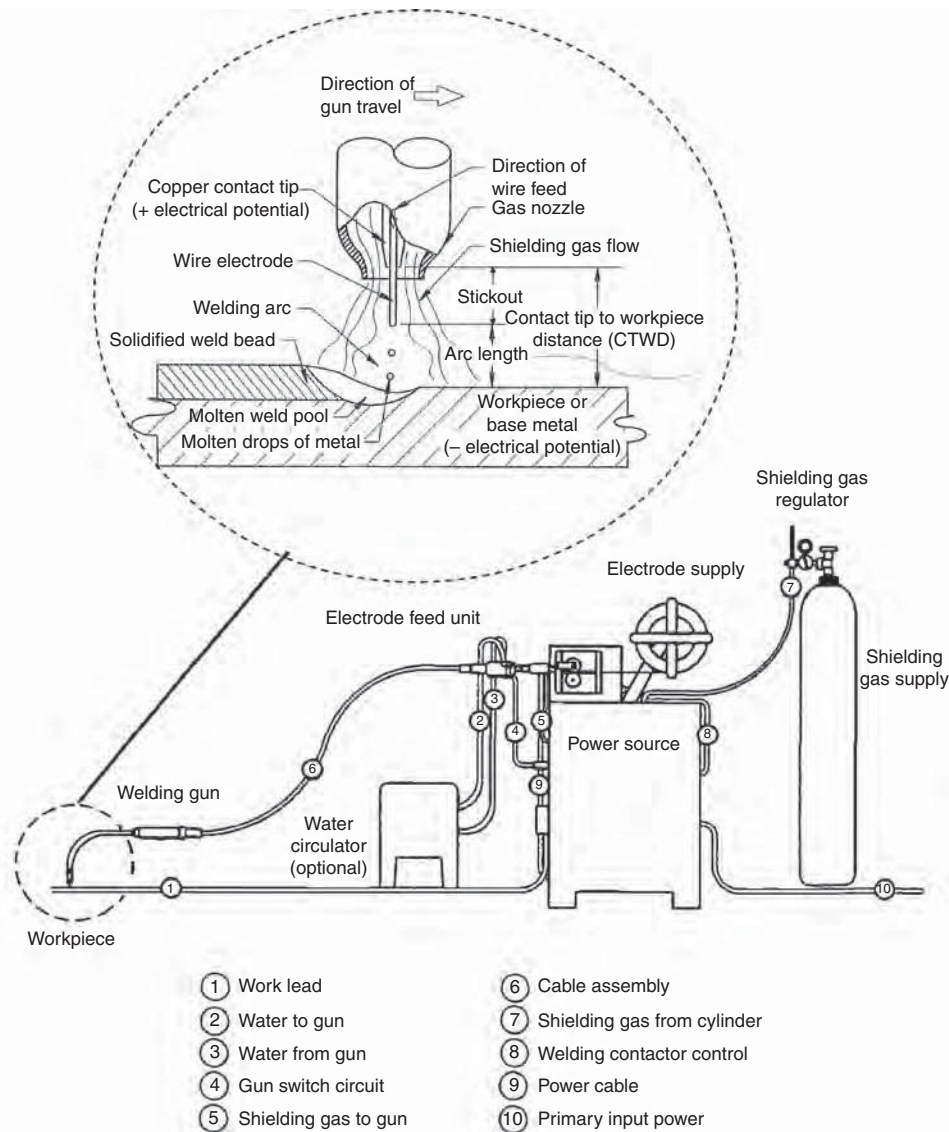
Typical gas metal arc welding equipment configuration
